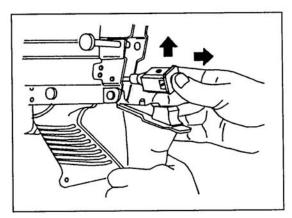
Removal of the return rod and transfer mechanism assembly
